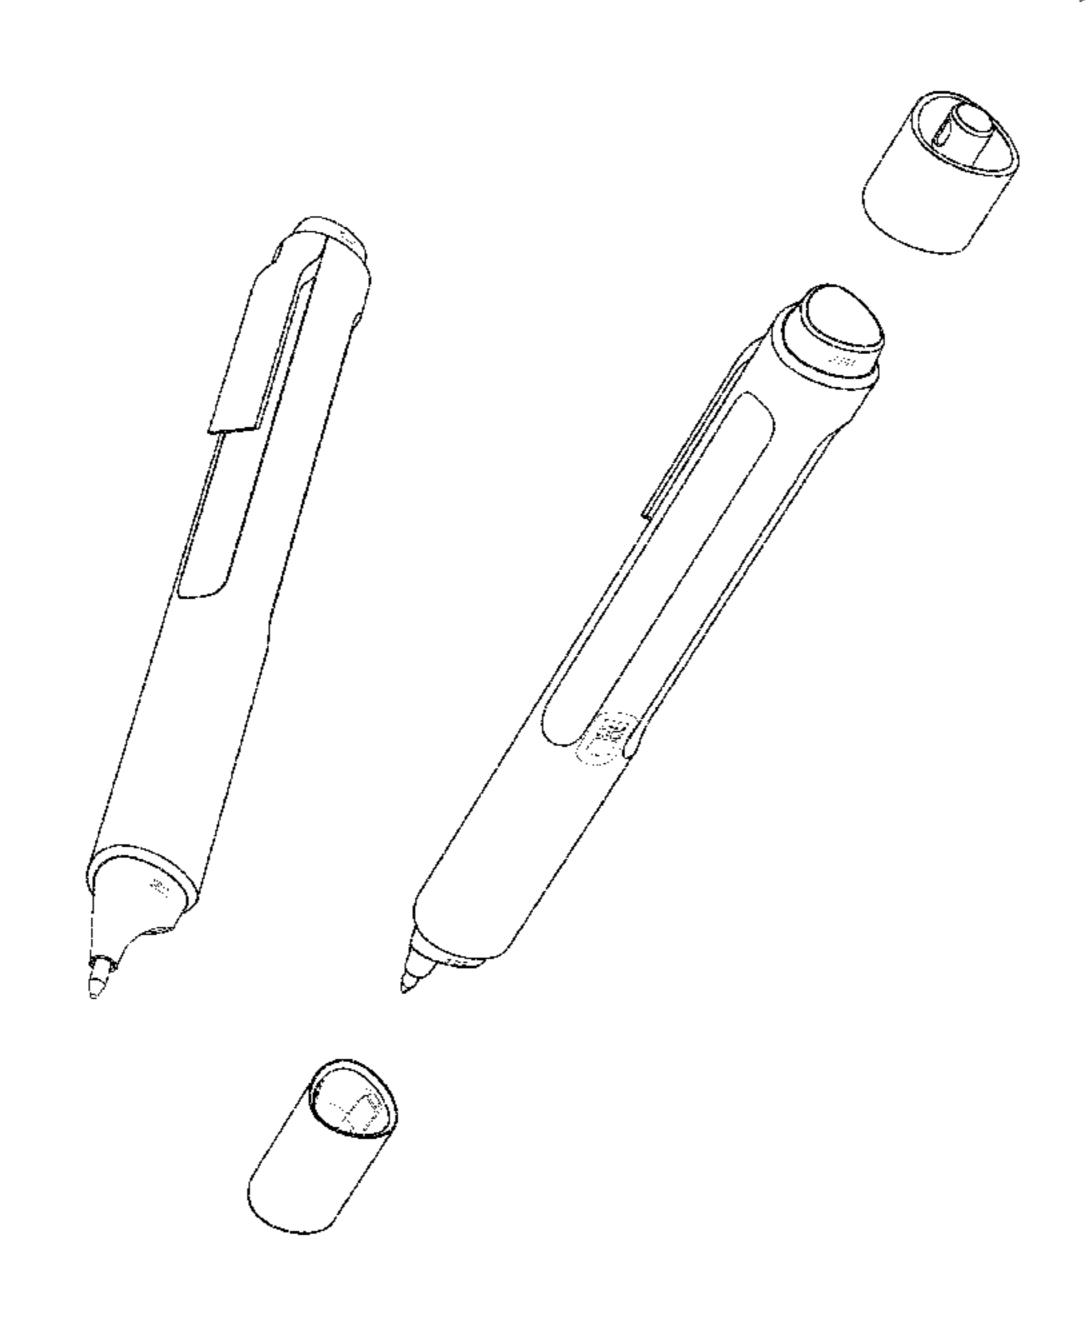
is the bottom, front, right perspective view of the digital pen shown in FIG. 9 shown with the end caps disengaged;
